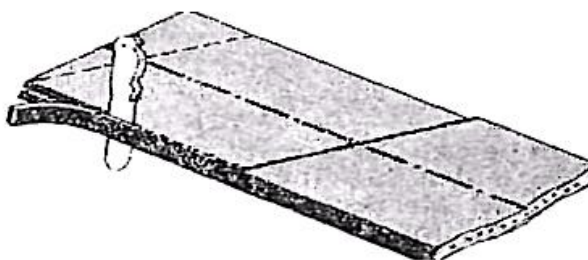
Drawing of the joint area and cutting of the rubber edges
